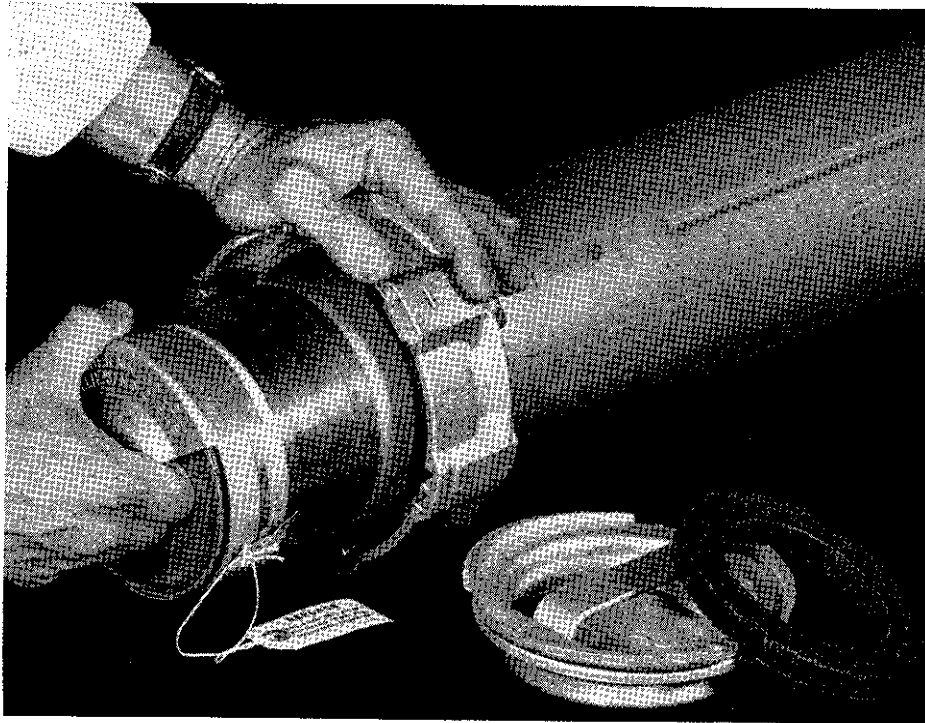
Use of Extractor in Removal of 5.0-in. Rocket Motor From Rocket Container Mk 10 Mod 0.
